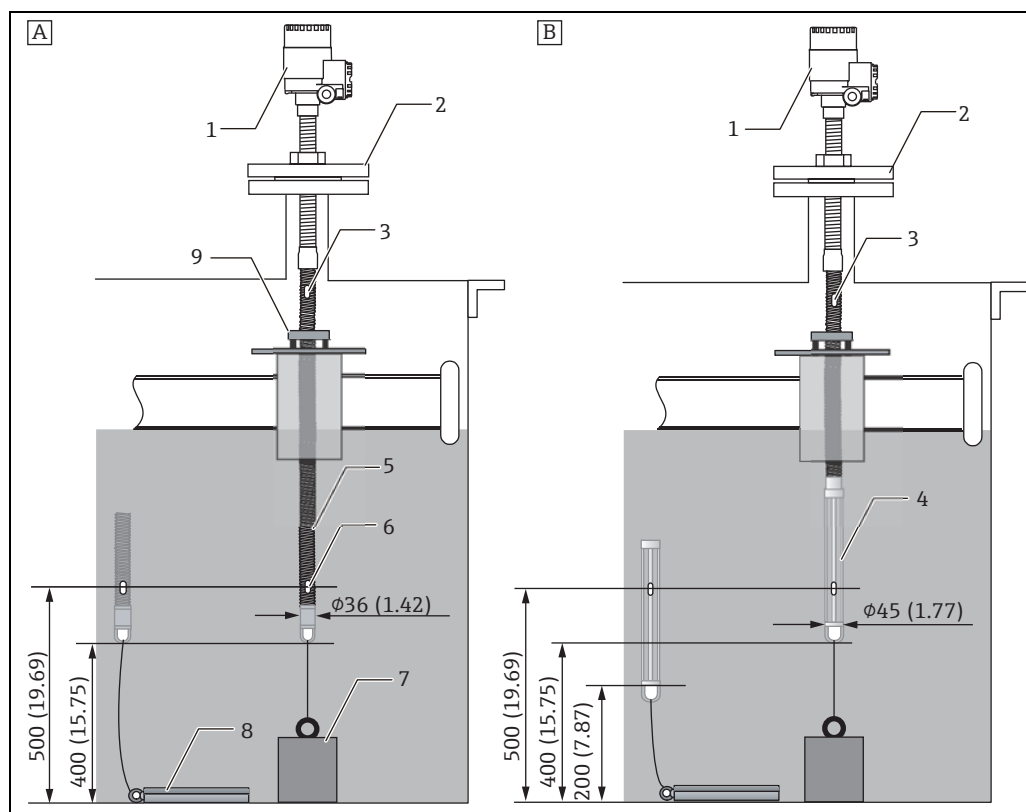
Guide ring and anchor weight, Unit of measurement: mm (in)
